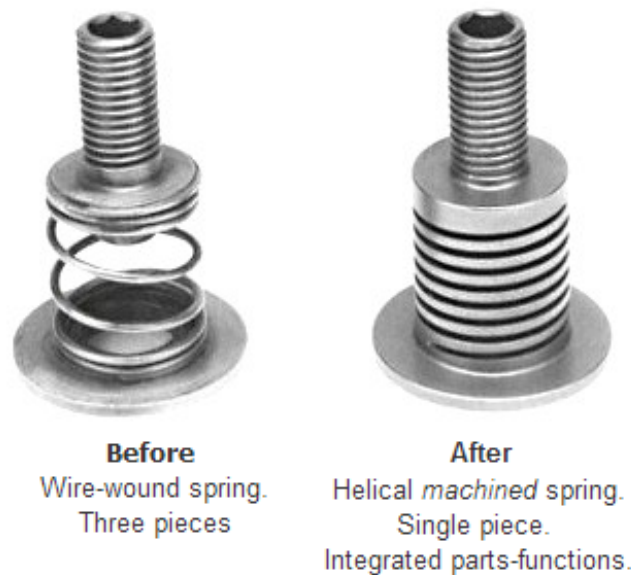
Helical Products Company produces machined springs that can deliver precise alignment and a constant spring rate in one package.
